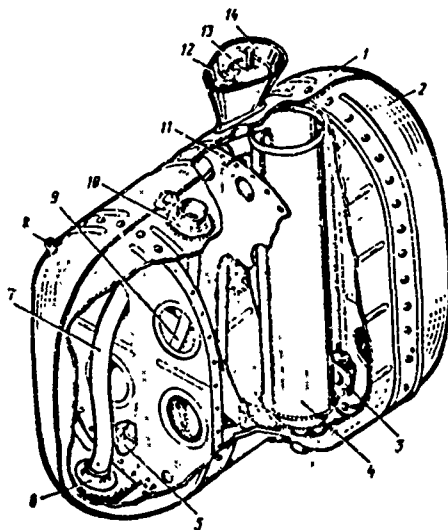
Oil tank of lightened construction, installed on aircraft from the 36th series: 1, 2 - shells; 3 - fitting drain; 4 - preheating and antifoam well; 5 - drainage fitting; 6 - oil return fitting to the tank; 7 - drainage tube; 8 - metallization eye; 9 - oil return tube to antifoam well; 10 - engine draining fitting with tank; 11 - partition; 12 - oil level gauge; 13 - cover with filler neck; 14 - filler neck with filter.
